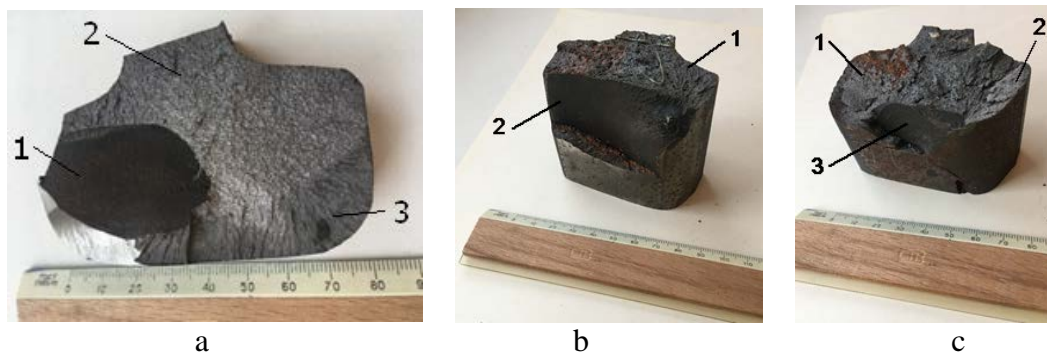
View of fracture rail fracture surface: a – *rail_a*, b – *rail_b*, c – *rail_c
